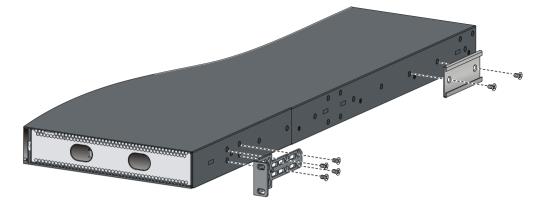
Attaching the mounting brackets and chassis rails to the HPE 5940 4-slot switch (power supply-side mounting position for the mounting brackets)
